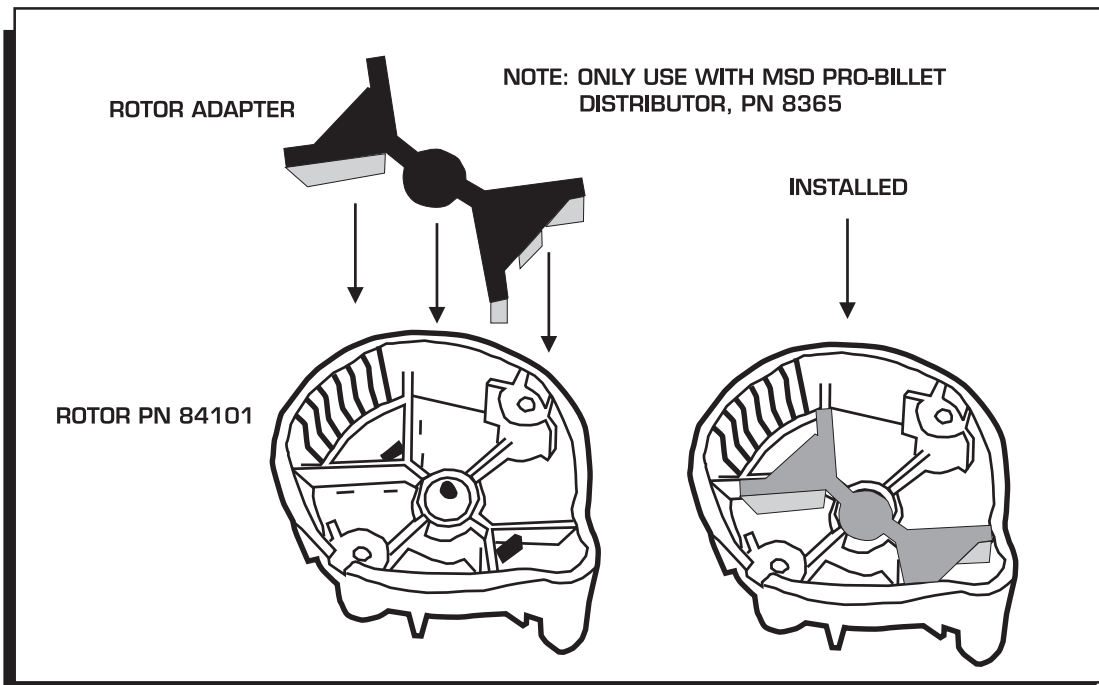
Installing the Rotor Adapter on an MSD PN 8365 HEI Distributor.
